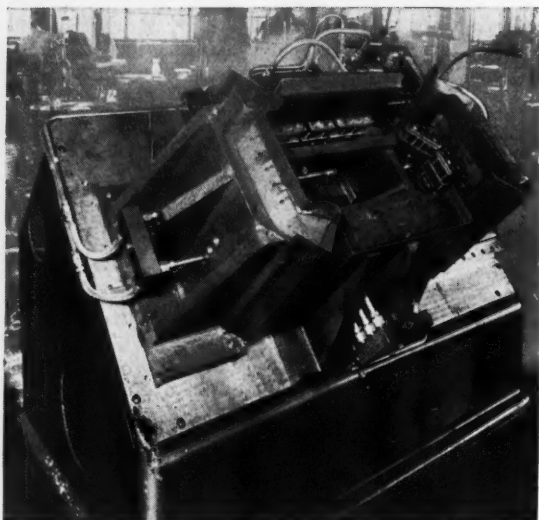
Machine employing hydraulic piercing units for making holes in the flange of English gas tank.
